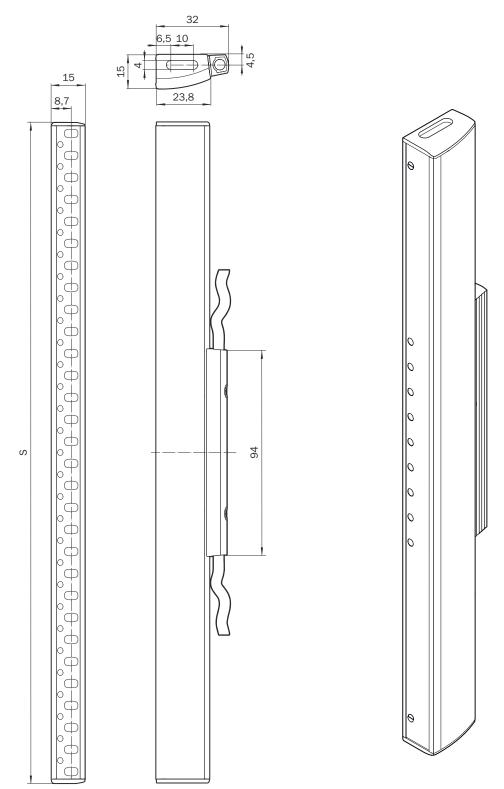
Dimensional drawing for the miniTwin2 (mm)
